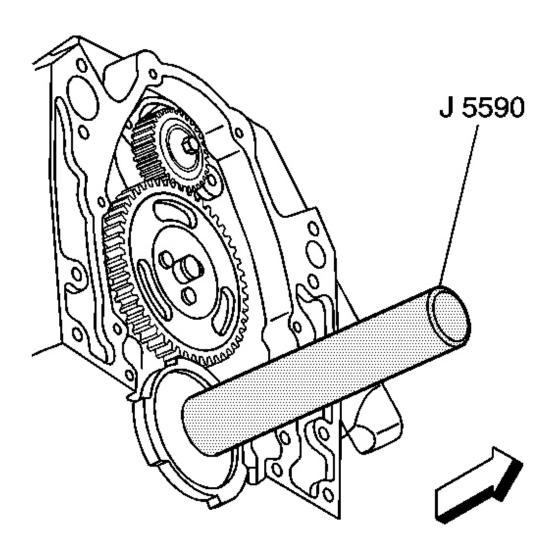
Installing CKP Sensor Ring Courtesy of GENERAL MOTORS CORP.
